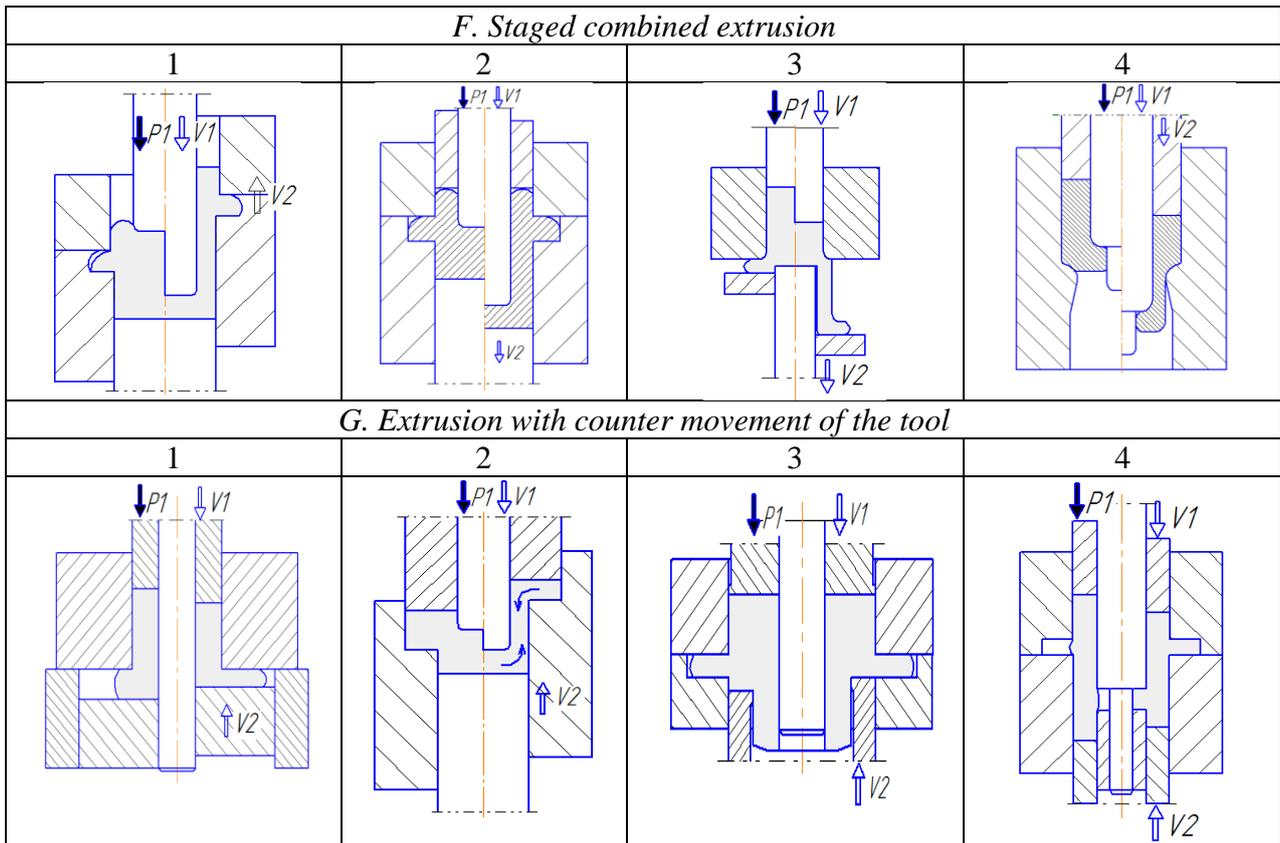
Schemes of staged combined extrusion with complex kinematics of tool movement
